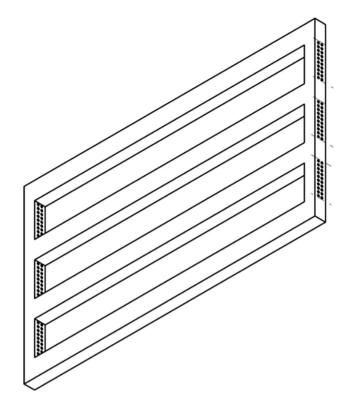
A sectional view of the assembled mould for the mechanical test samples.
